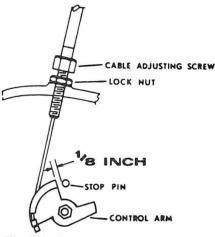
Automatic oil pump meter ing control arm should have 1/8 inch clearance with throttle fully open.
